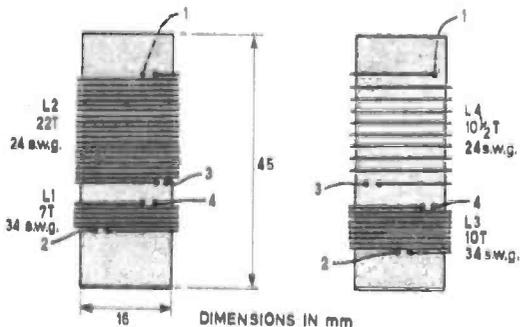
Winding details for the two sets of coils. The completed coils are mounted on the chassis using small sections from a wooden dowel forced into the base of each coil and glued. The coil is then mounted vertically on the chassis using short wood screws.
